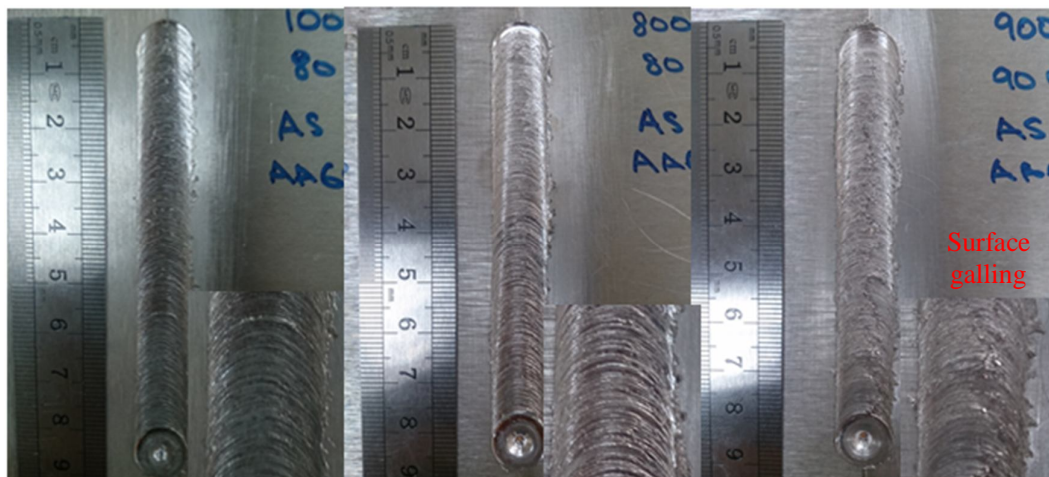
Weld appearance of FSW between AA6061 and AZ31B (a) Sample 2 (b) Sample 1 (c) Sample 9.
